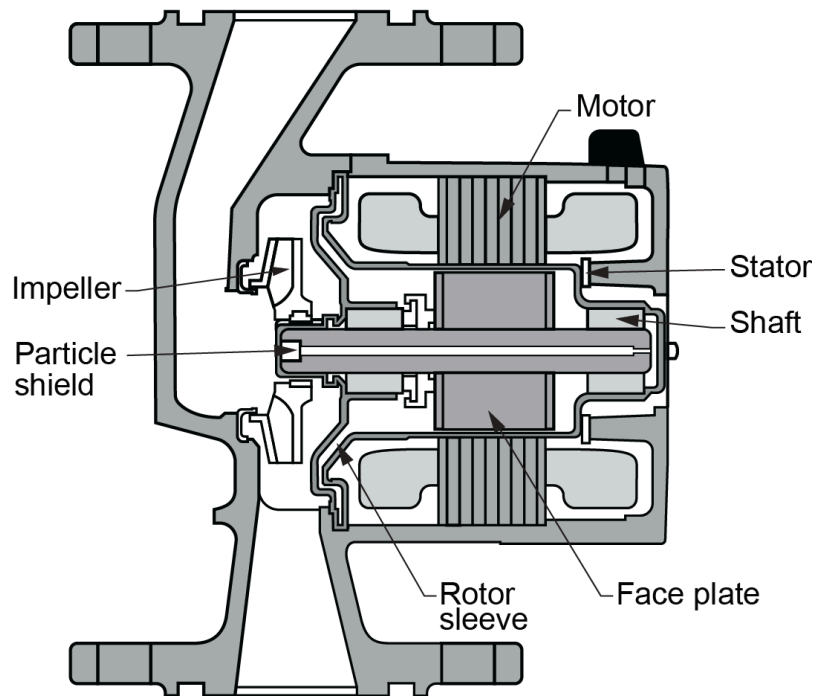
Wet-rotor circulator cutaway. (Skilled Trades BC, 2021) Used with permission.
